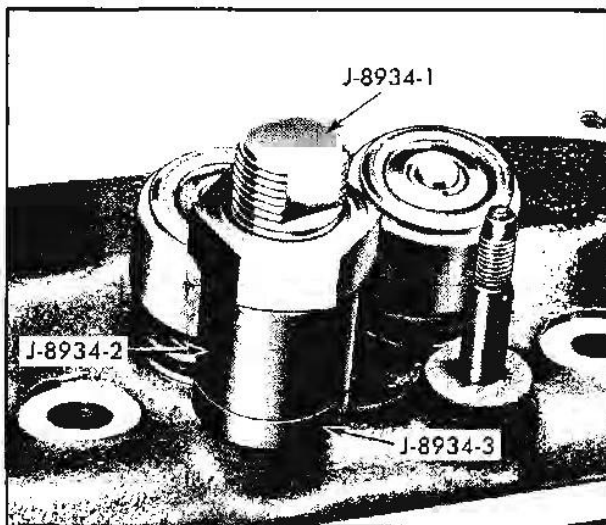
Tool J-8934 Positioned to Remove Rocker Arm Stud
